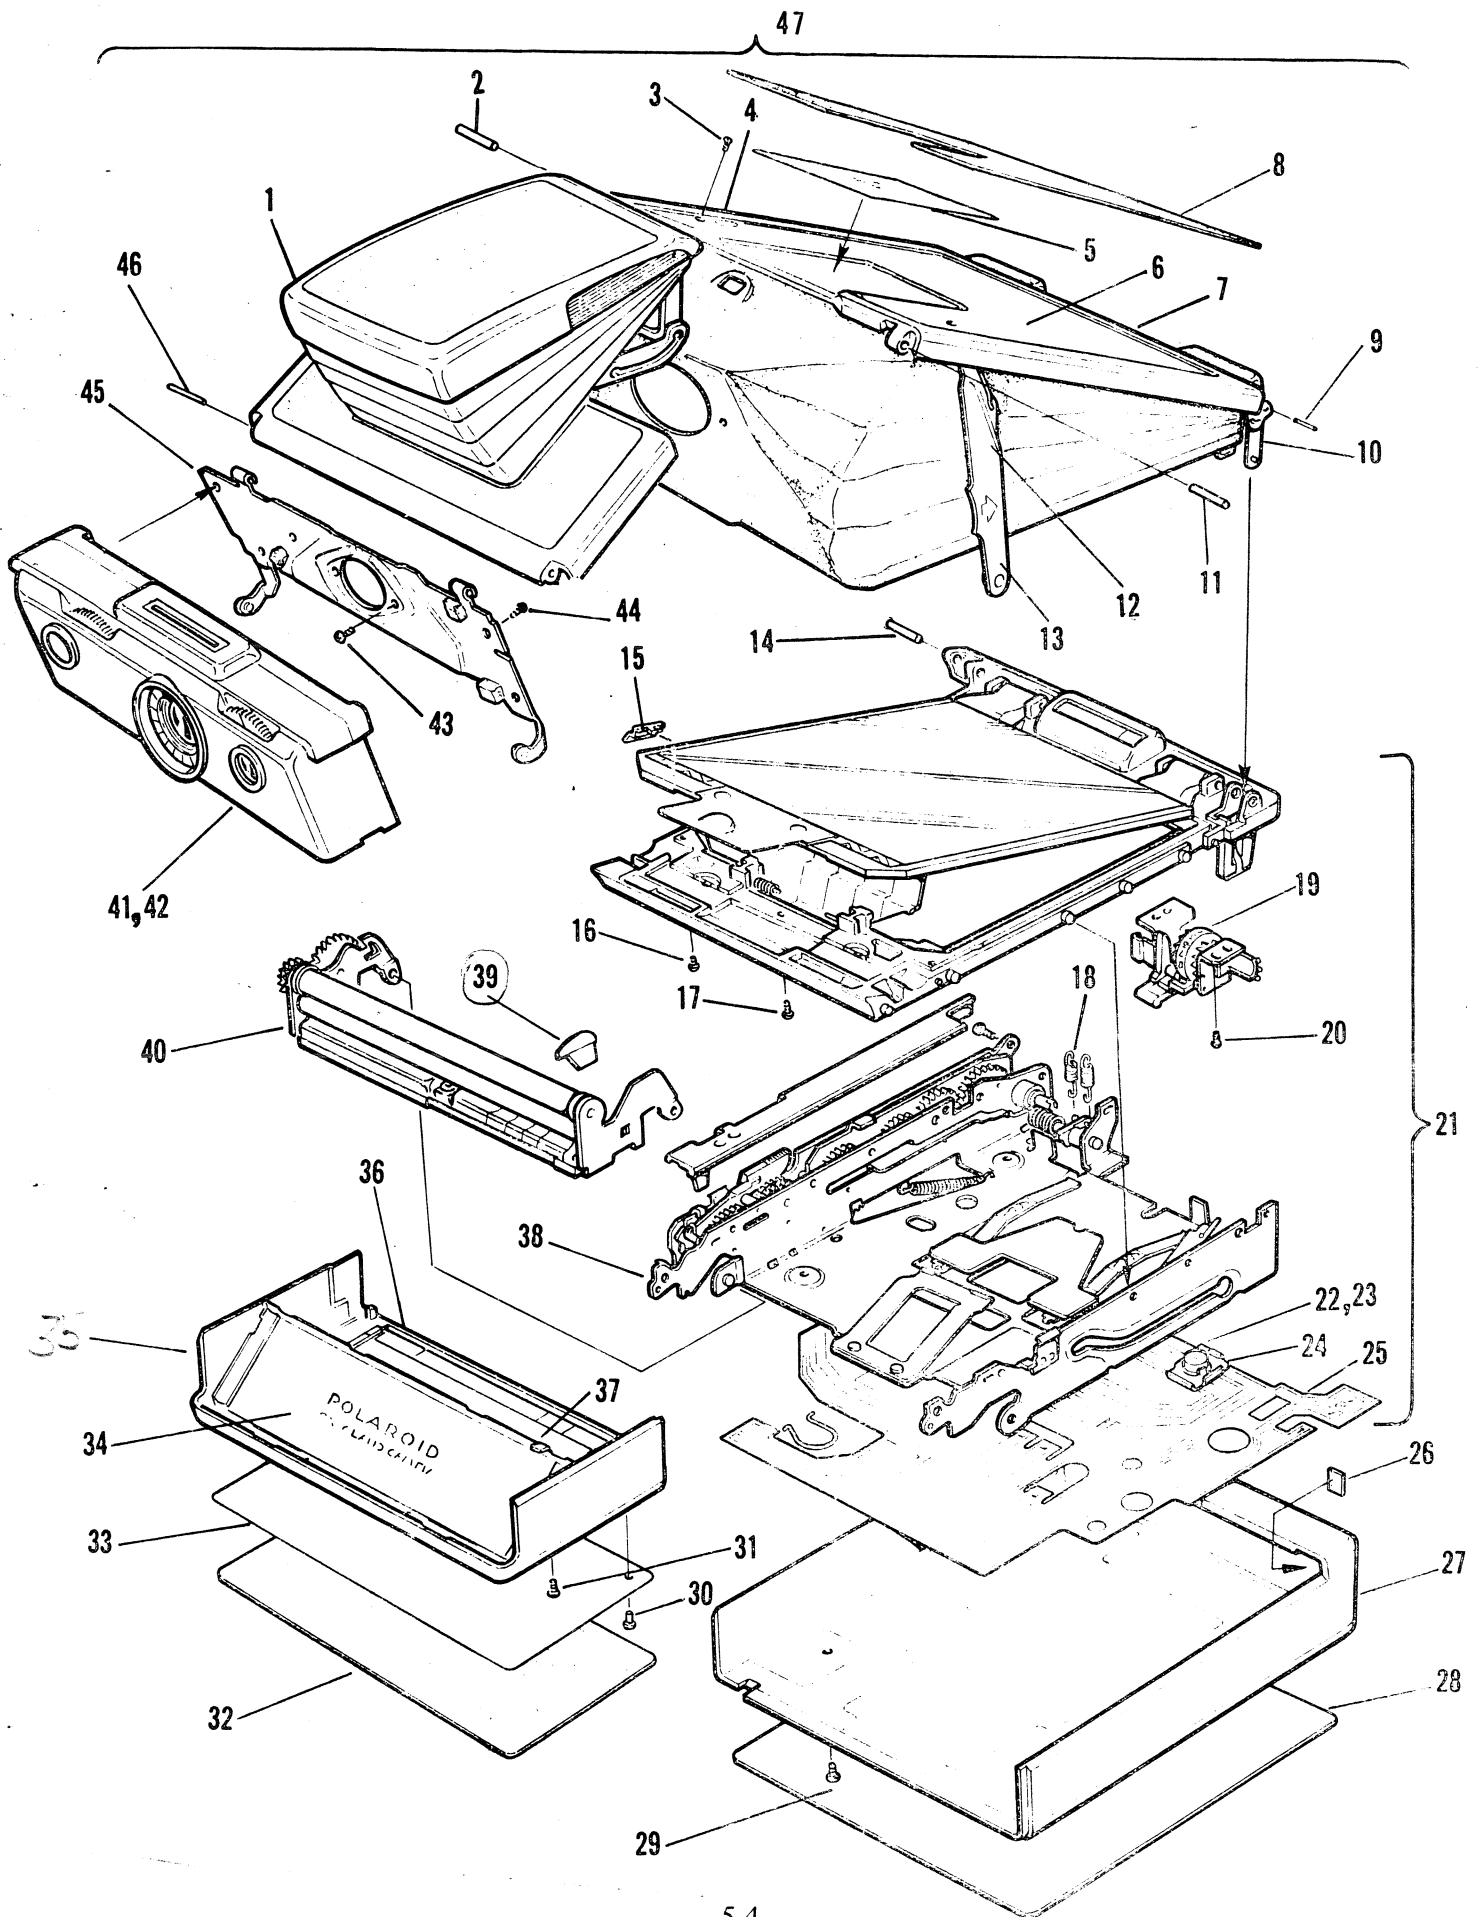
FINAL CAMERA ASSEMBLY
